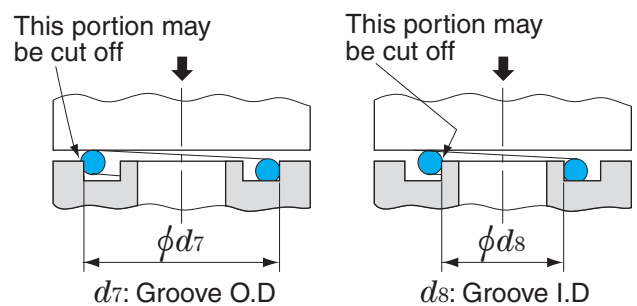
Fitting groove for static sealing of flat surface
